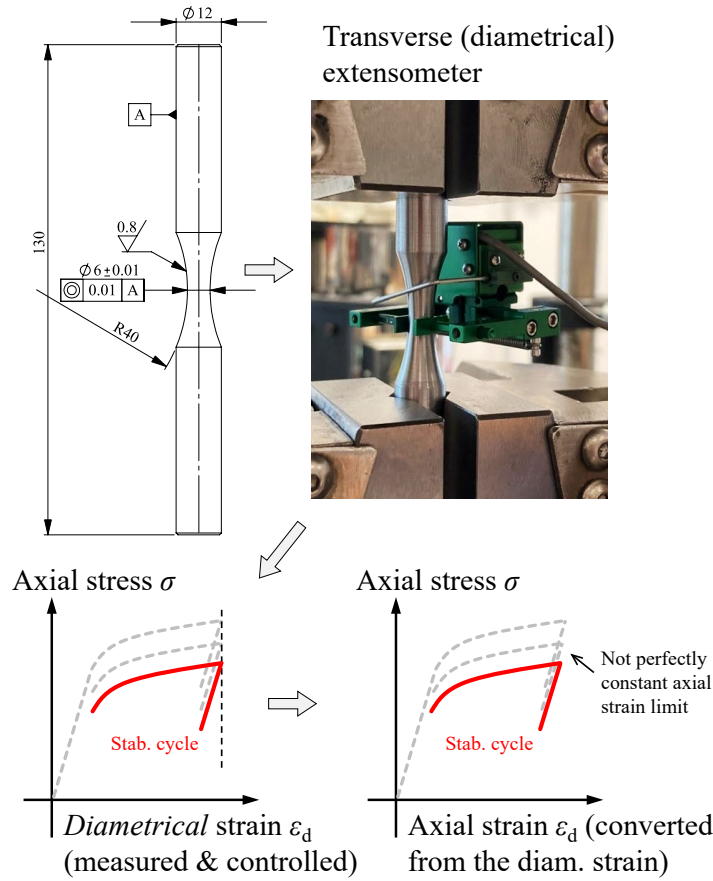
Hourglass specimen and transverse extensometer setup for tests under (diameter) strain control.
